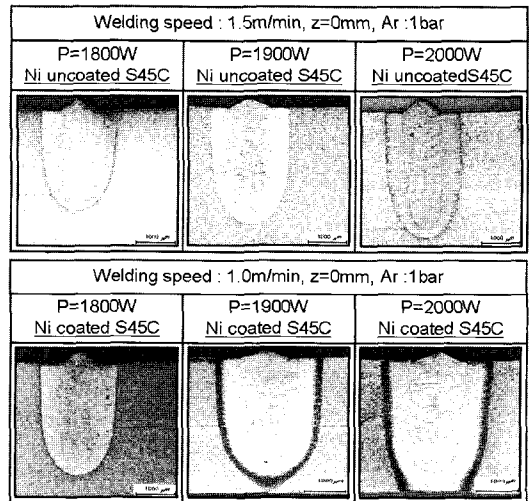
optimum welding process parameter after bead on plate welding
